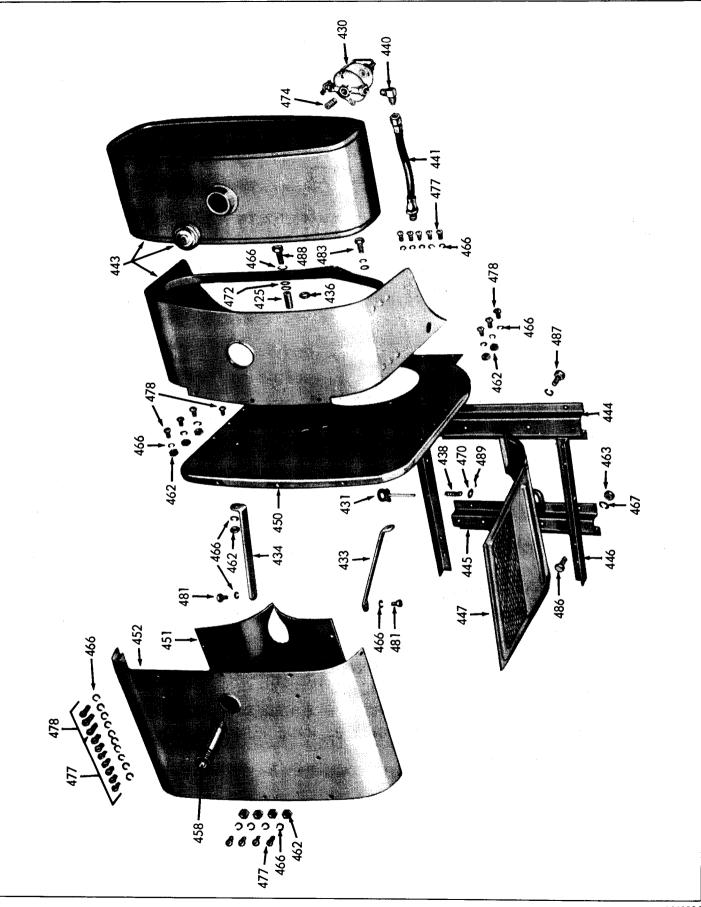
, ENGINE HOUSE WITH FUEL TANK AT TAKE-OFF END Parts are identified by reference number. See parts list for correct part number.
